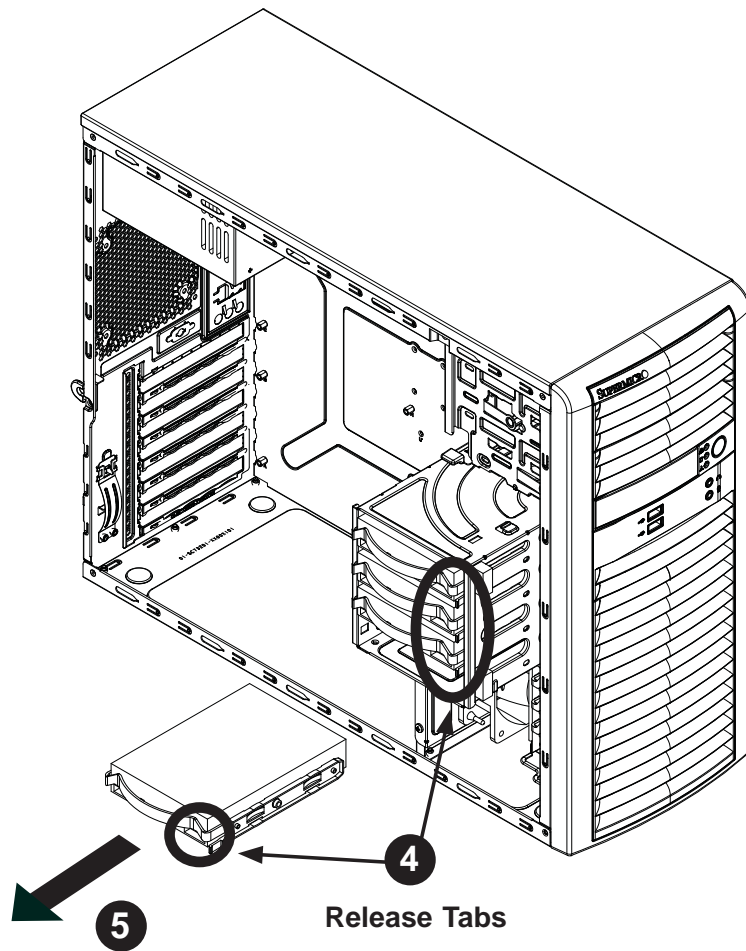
Removing a Hard Drive Carrier from the Hard Drive Cage
